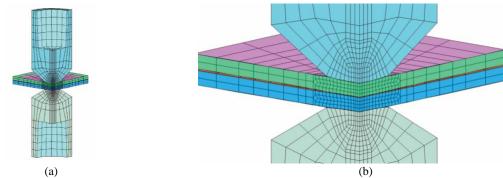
View of the grid of the spot welding model in the Sorpas 3D: a) the entire model, b) the welding area [14]
